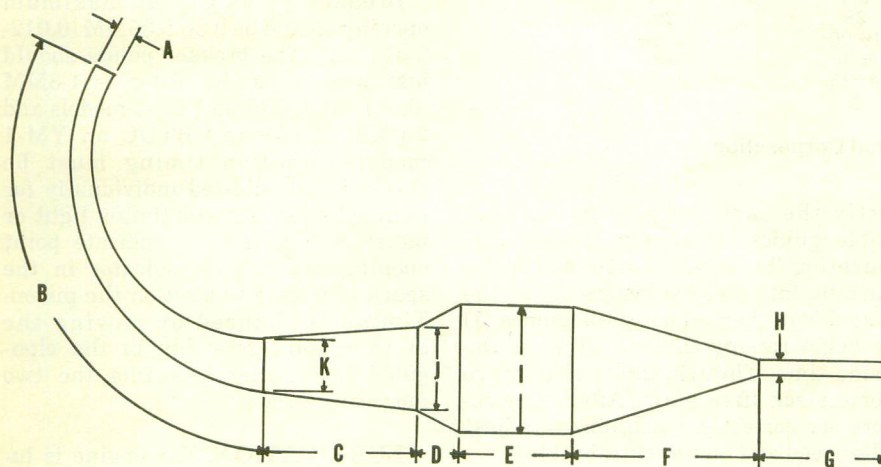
Basic expansion chamber diagram. Chambers vary greatly from one engine to the next due to type of riding and variations in engine design. Refer to text for dimensions of particular models.
